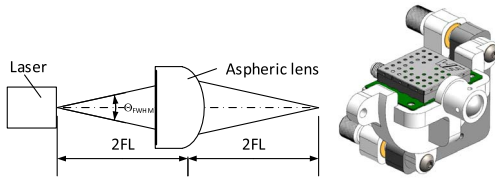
Optical system schematic (left) and assembled holder with kinematic mount 3-D drawing (right).
